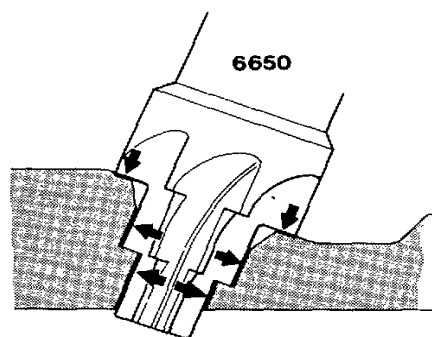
Cutting the seat for the copper sleeve (step 2).
